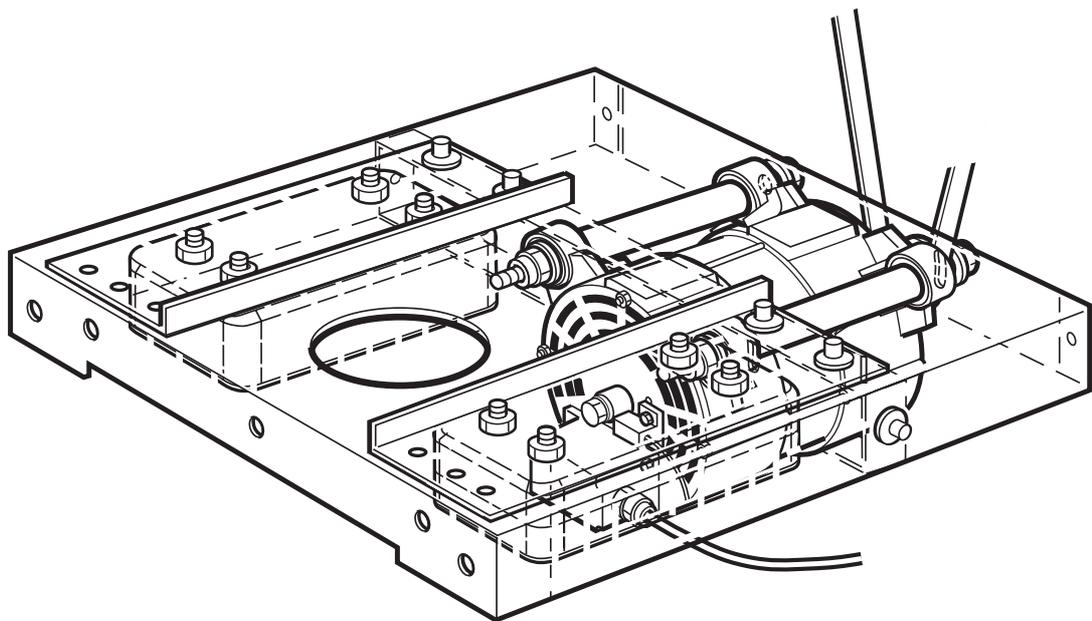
The motor is mounted inside a motor mounting unit beneath the outer drum. It drives the inner drum via a drive belt. The drive belt tension is adjusted with the aid of two retaining screws on the side of the motor mounting unit. See the section “Belt tension” in this chapter.
